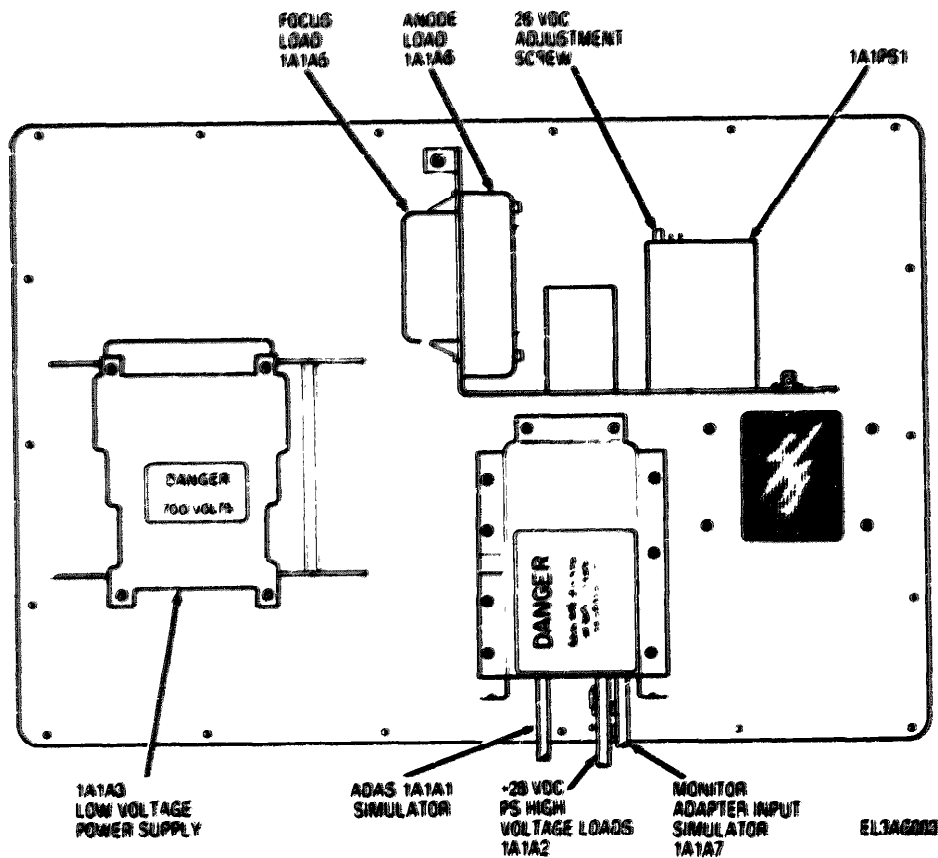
Test Set Subassembly MX-8638A/APS-94D, 1A1, rear chassis view, parts location.
